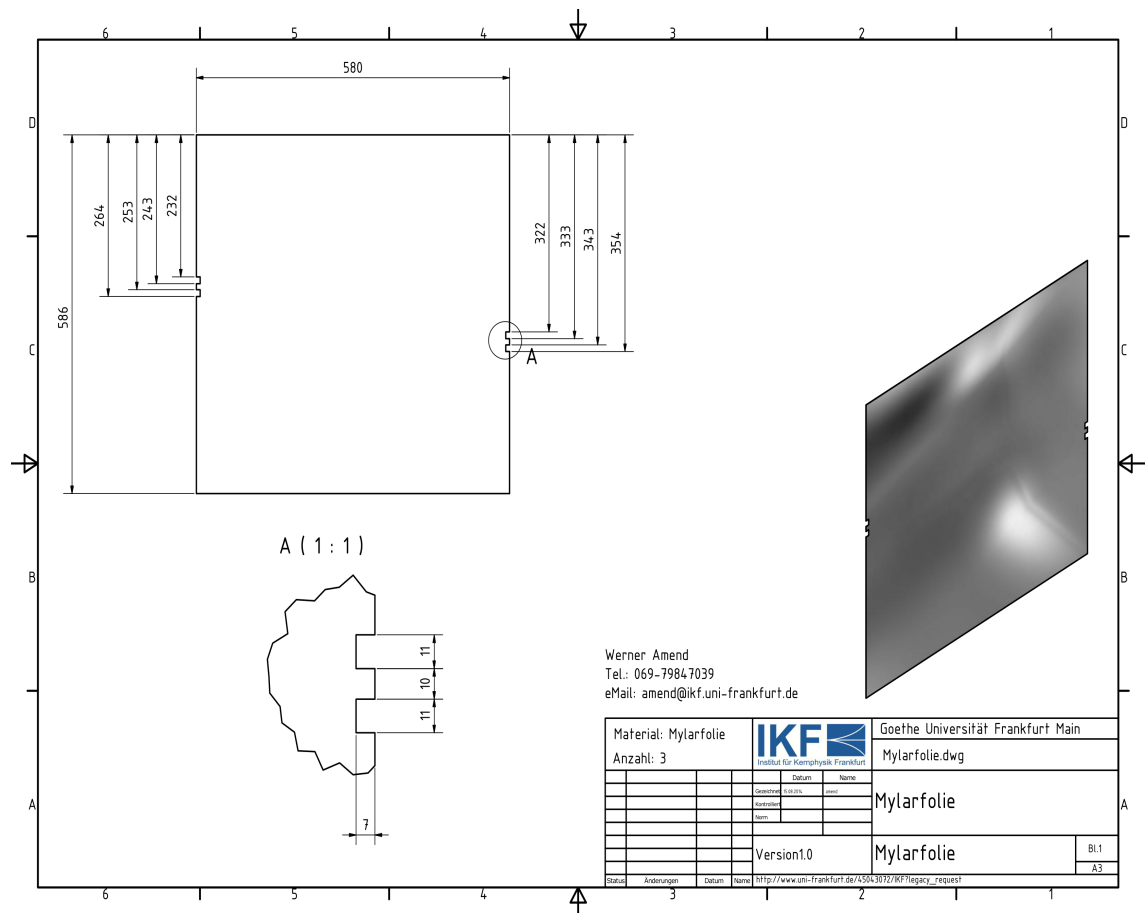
Mlar foil dimension and its connector at sides for the TRD with carbon fram.
